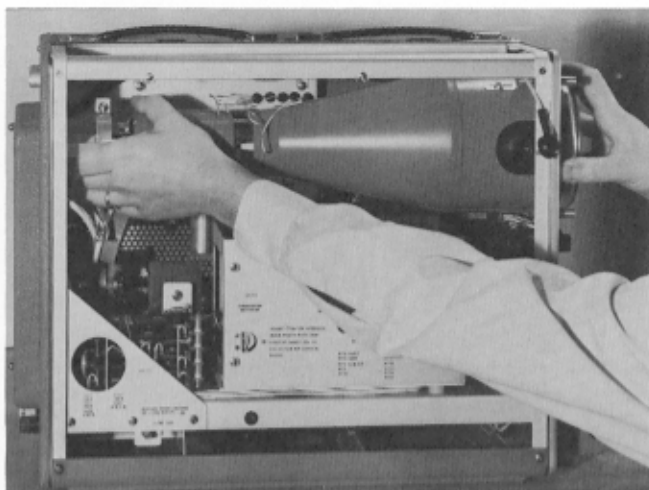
The method used to remove or replace the cathode-ray tube.
